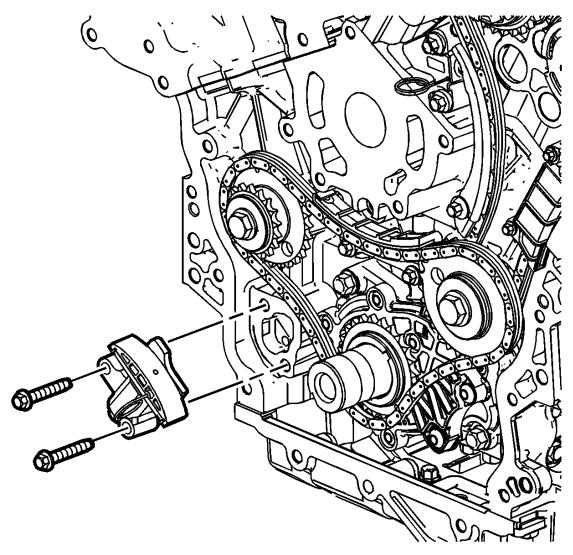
View Of Primary Camshaft Drive Chain Tensioner Courtesy of GENERAL MOTORS COMPANY
